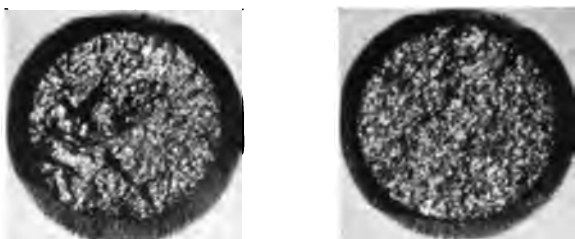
TEST-BAR FRACTURES, MUZZLE AND BREECH OF FORGING 1348 UNTREATED.
